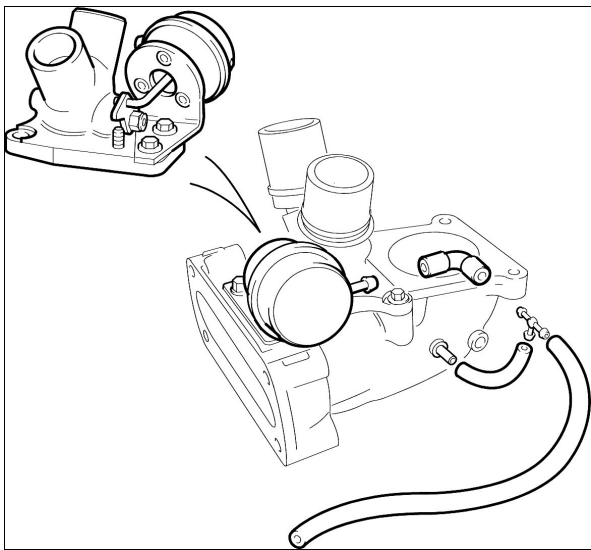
BYPASS VALVE AND ACTUATOR – AJ26
